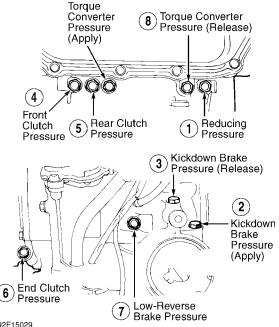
Identifying Transaxle Hydraulic Pressure Taps Courtesy of Mitsubishi Motor Sales of America.
